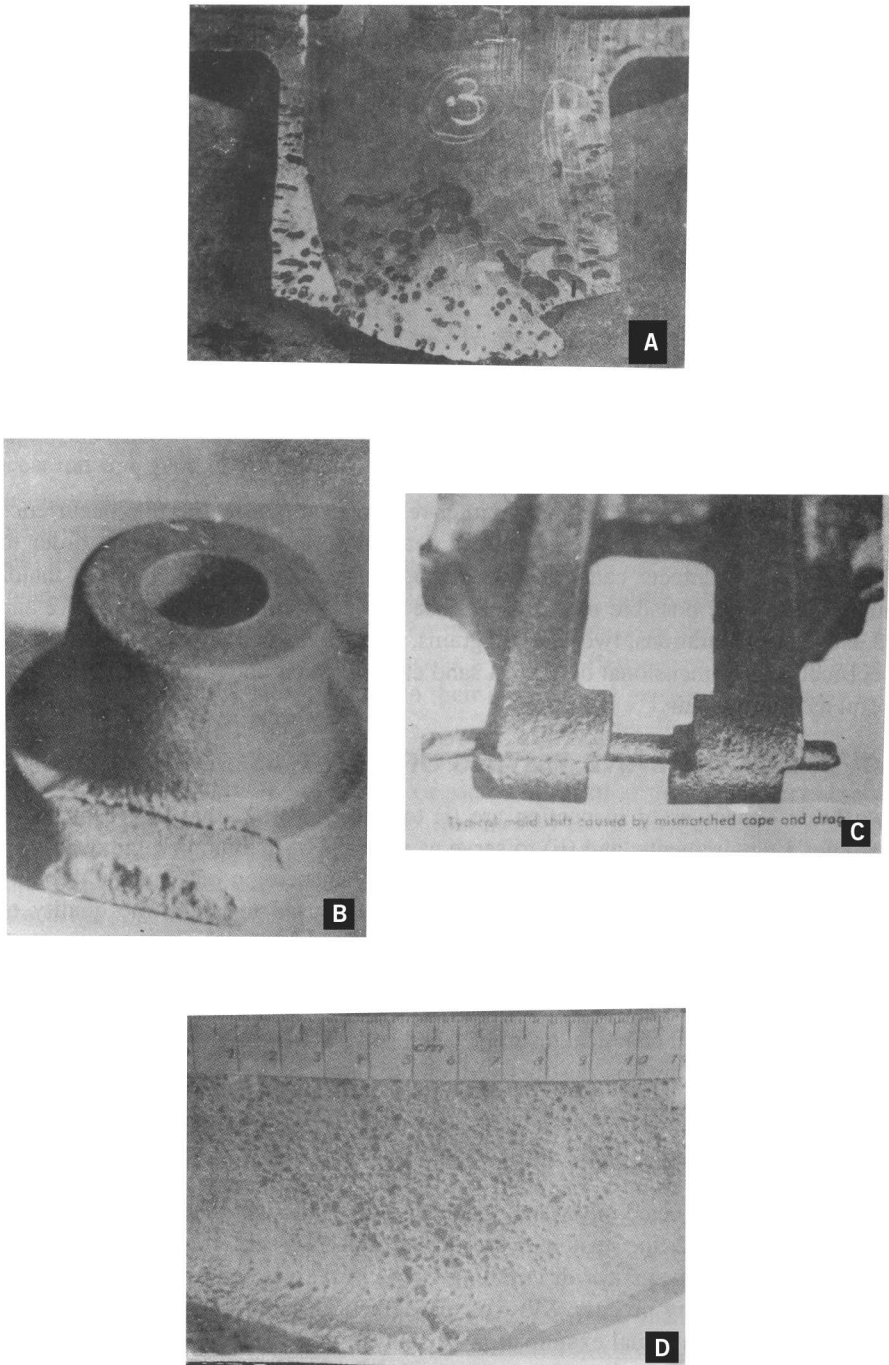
Different types of casting defect: (A) Blow holes (B) Cracked casting (C) Mismatch or shift (D) Pin holes
